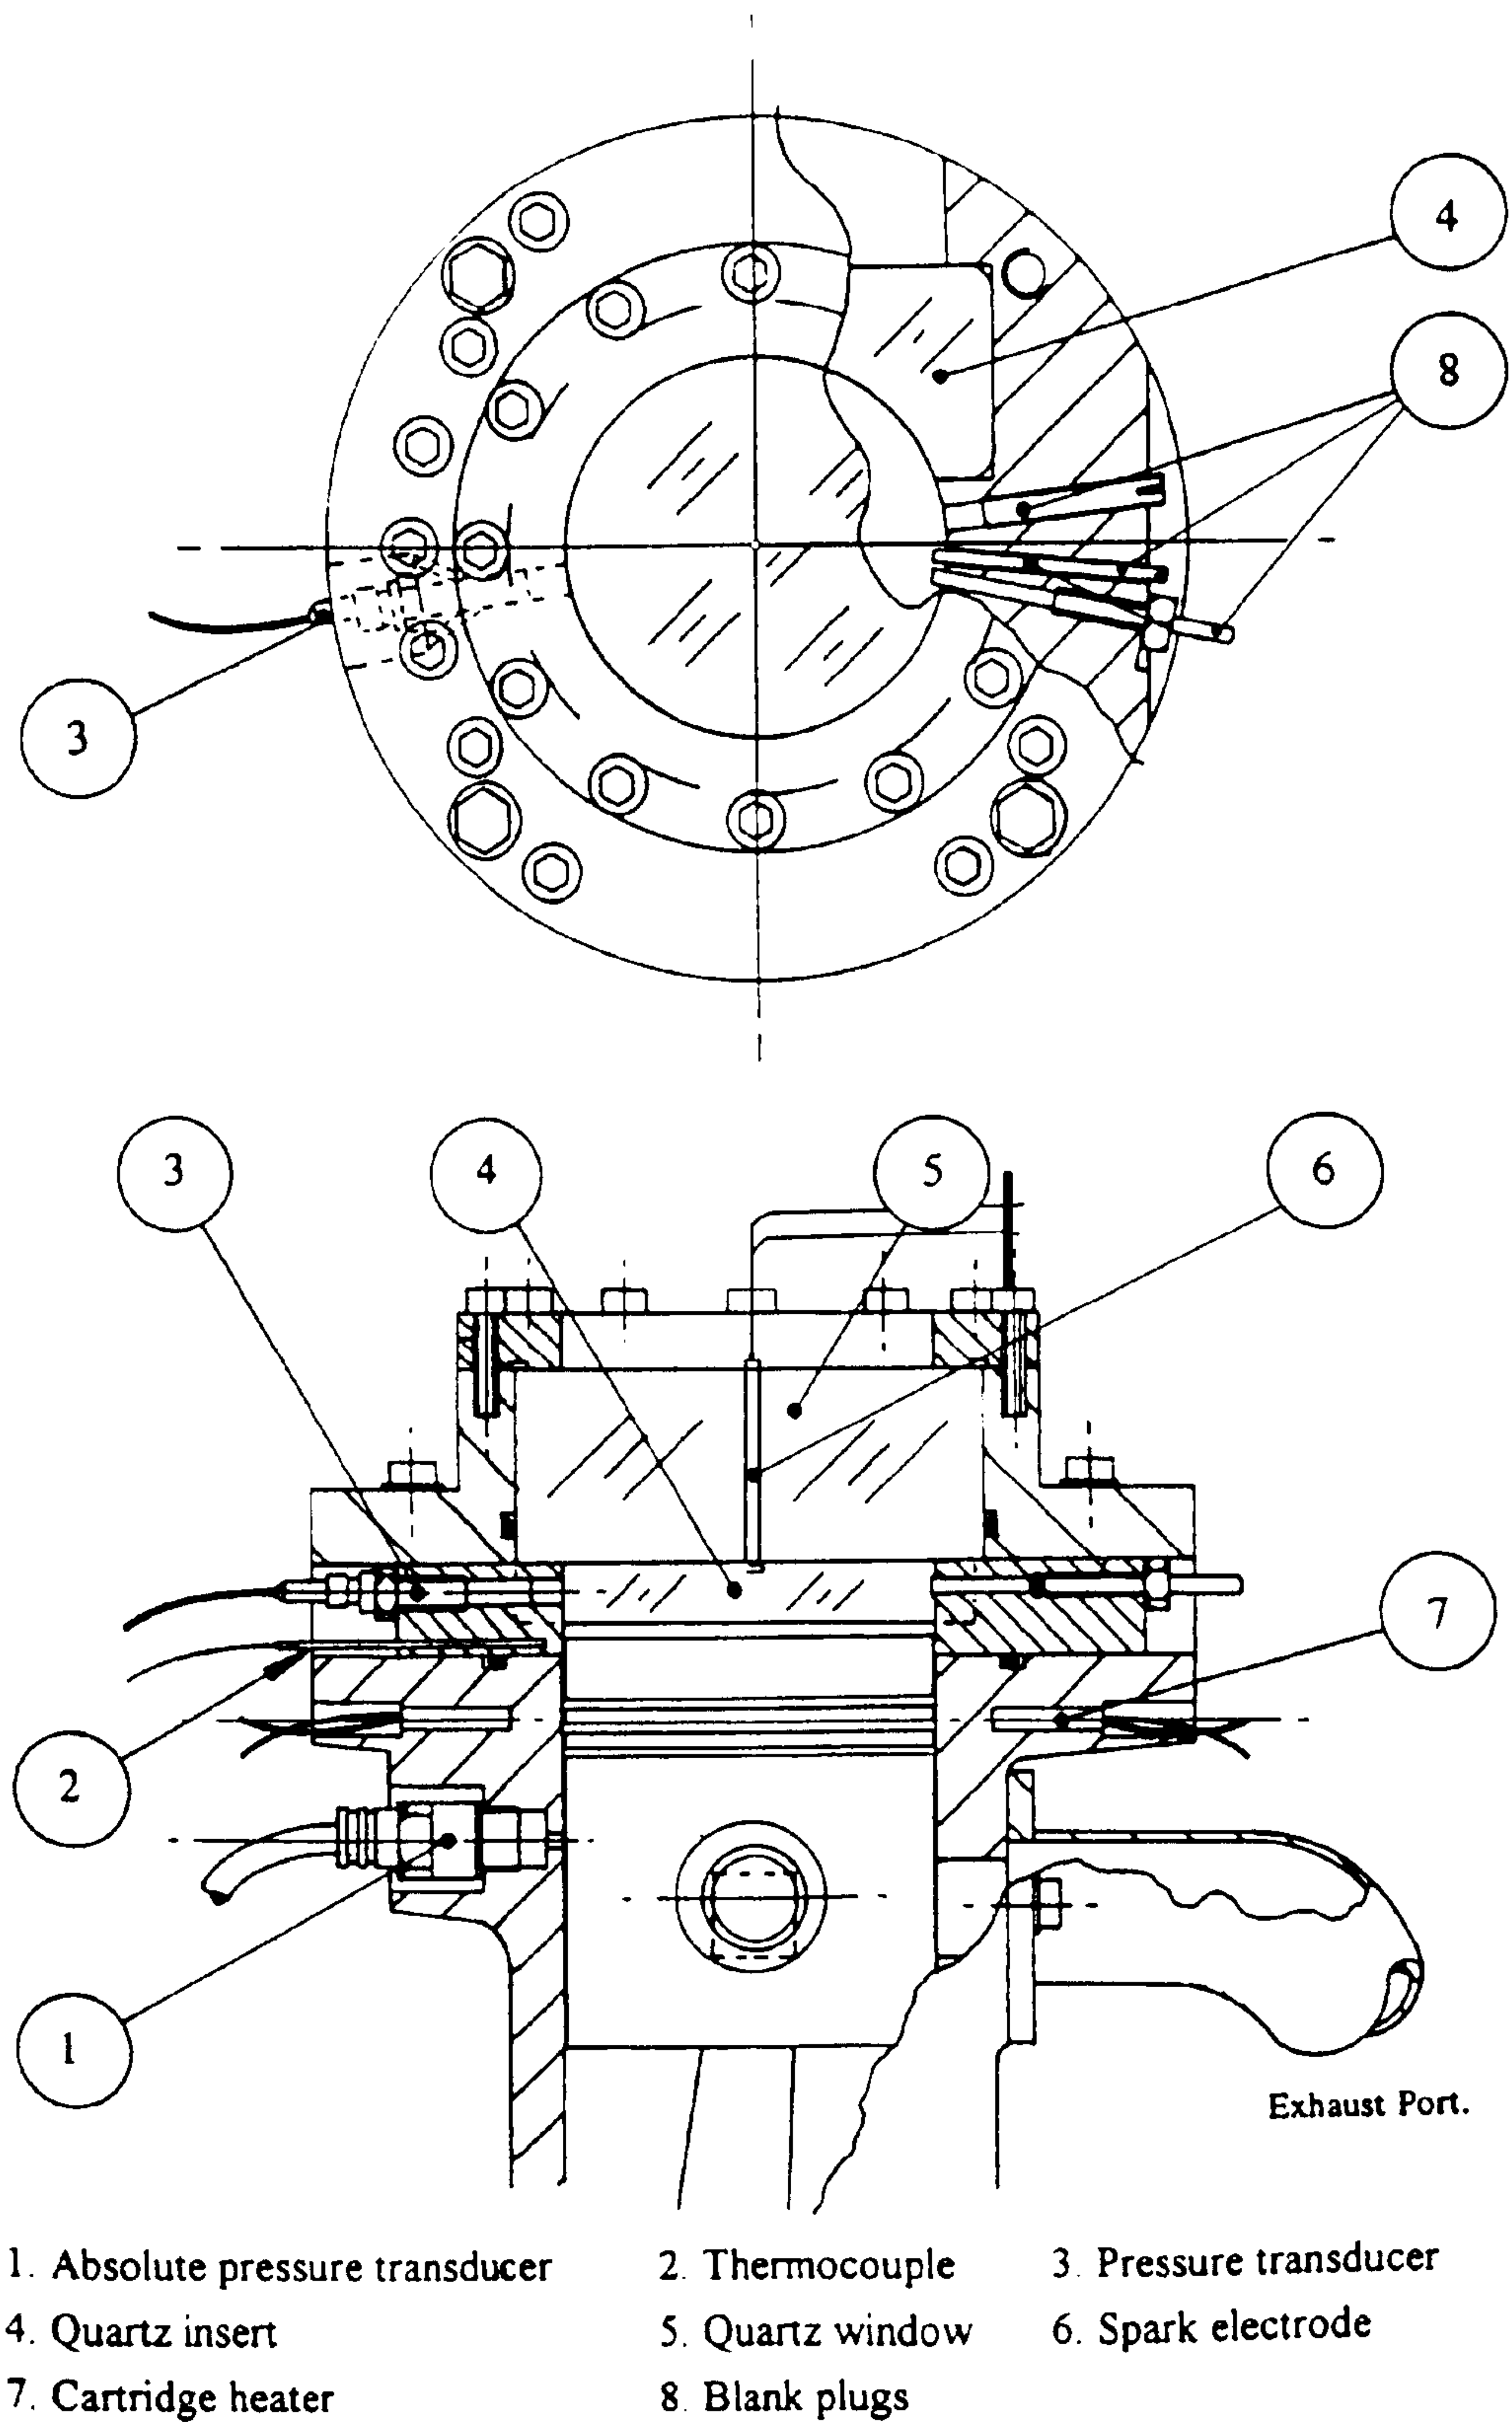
Disc shaped optical cylinder head assembly of LUPOE1 engine (modified from Hicks, 1994).
